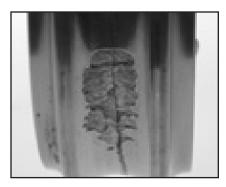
This ball bearing inner ring depicts fatigue spalling from high loads. The fracture is a secondary damage mode.
